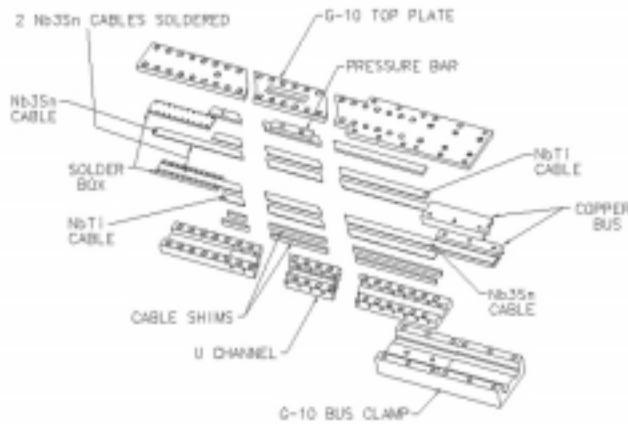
Exploded view of sample holder for measurements of the critical current of Rutherford cables.
